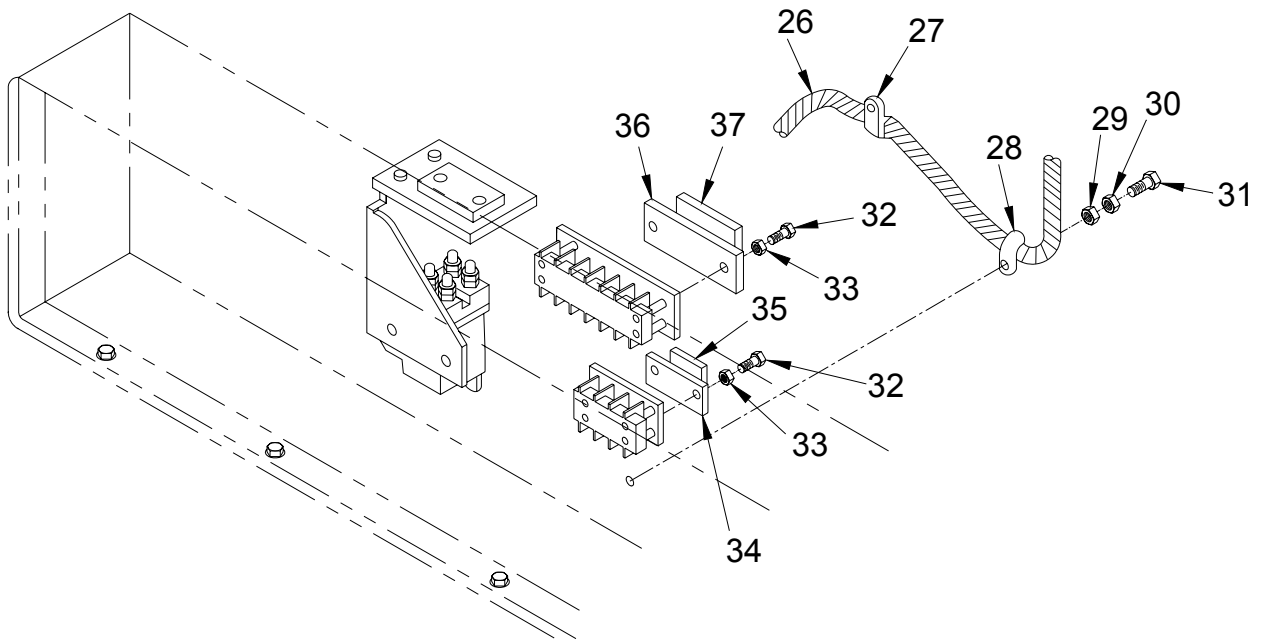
FRAME AND HOUSING ASSEMBLY/FRAME AND HOUSING PANELS
